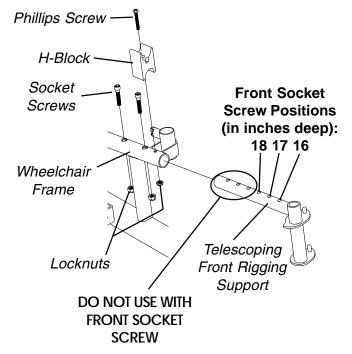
ADJUSTING/REPLACING TELESCOPING FRONT RIGGING SUPPORT
